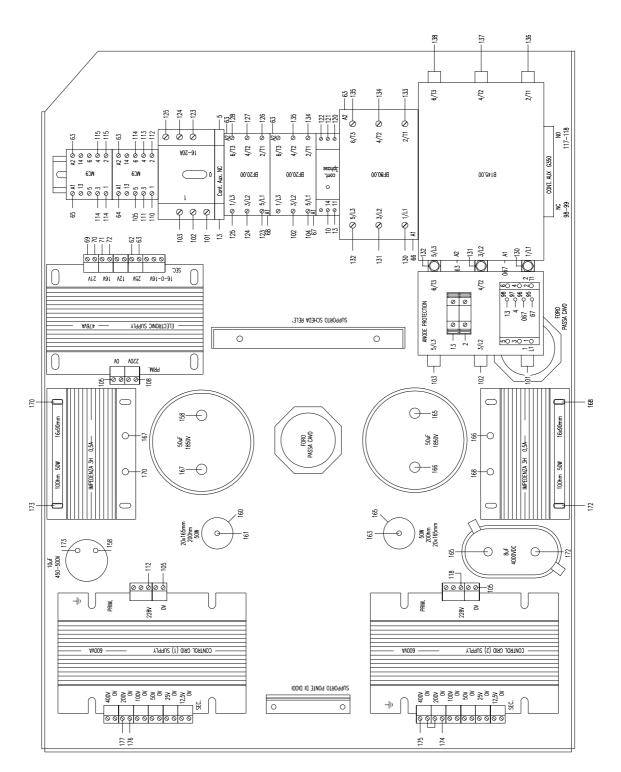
SECTIONAL VIEW OF THE POWER SUPPLY P2
